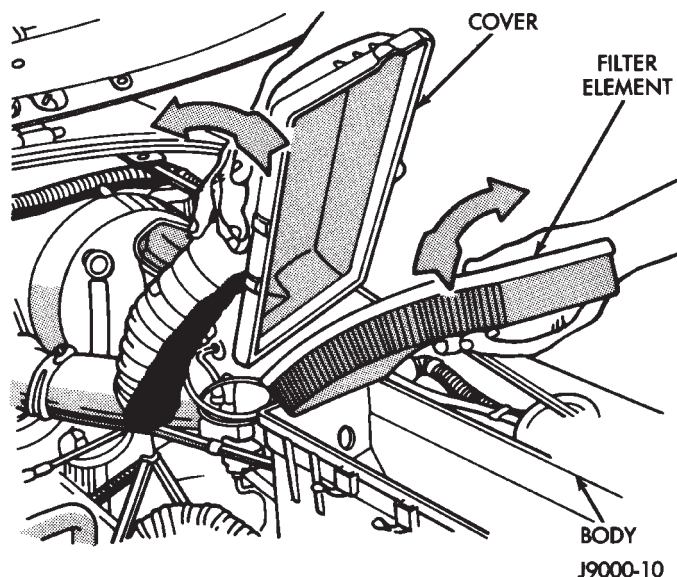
Air Cleaner & Filter Element—2.5L and 4.0L Engines
